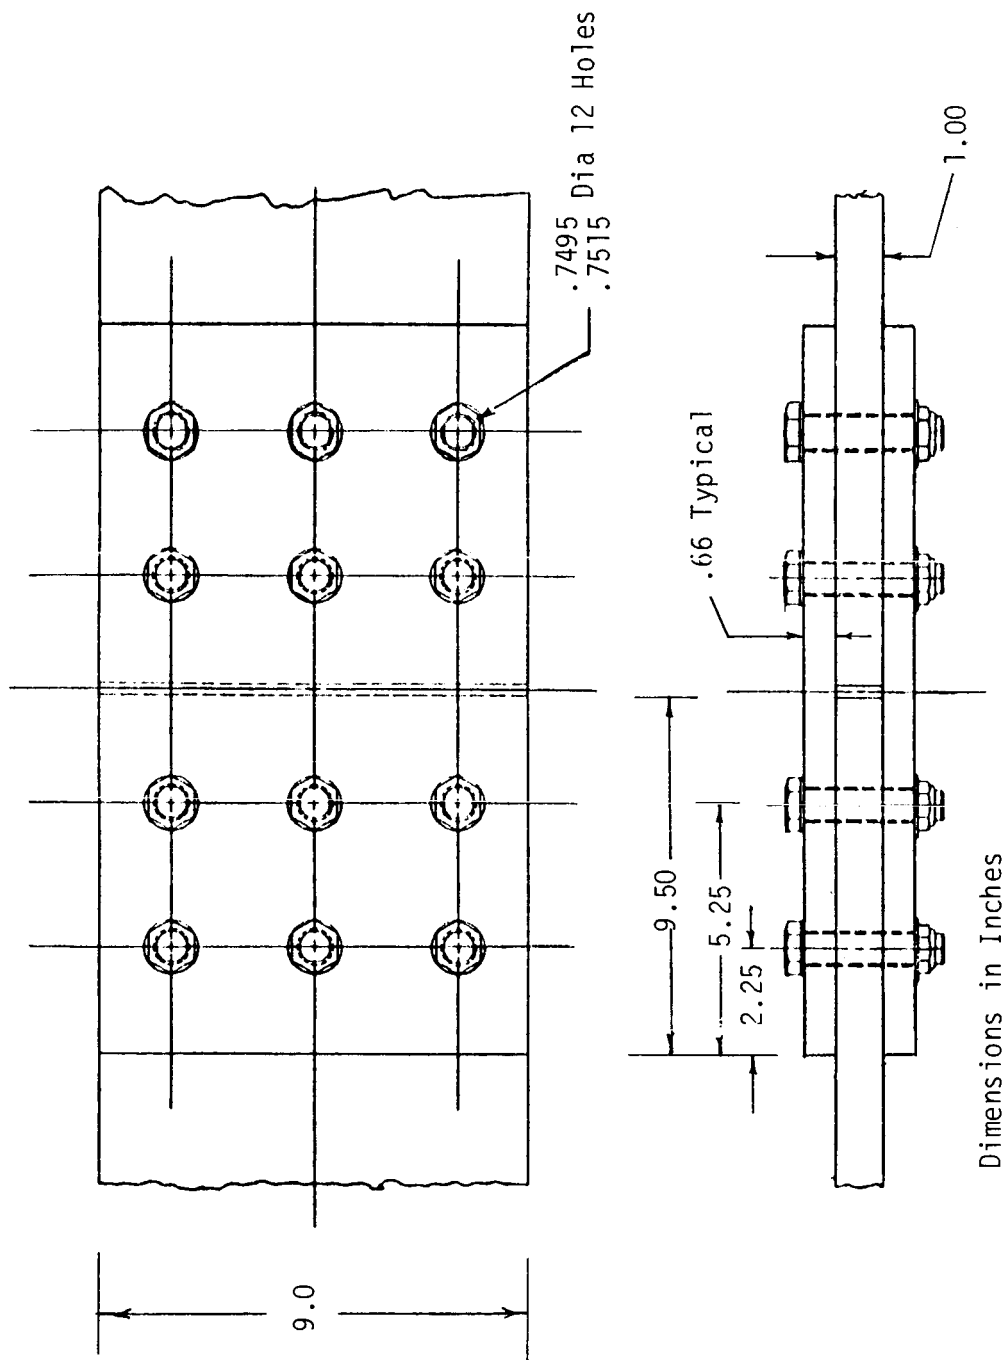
12-BOLT SUBCOMPONENT JOINT SPECIMEN CONFIGURATION
